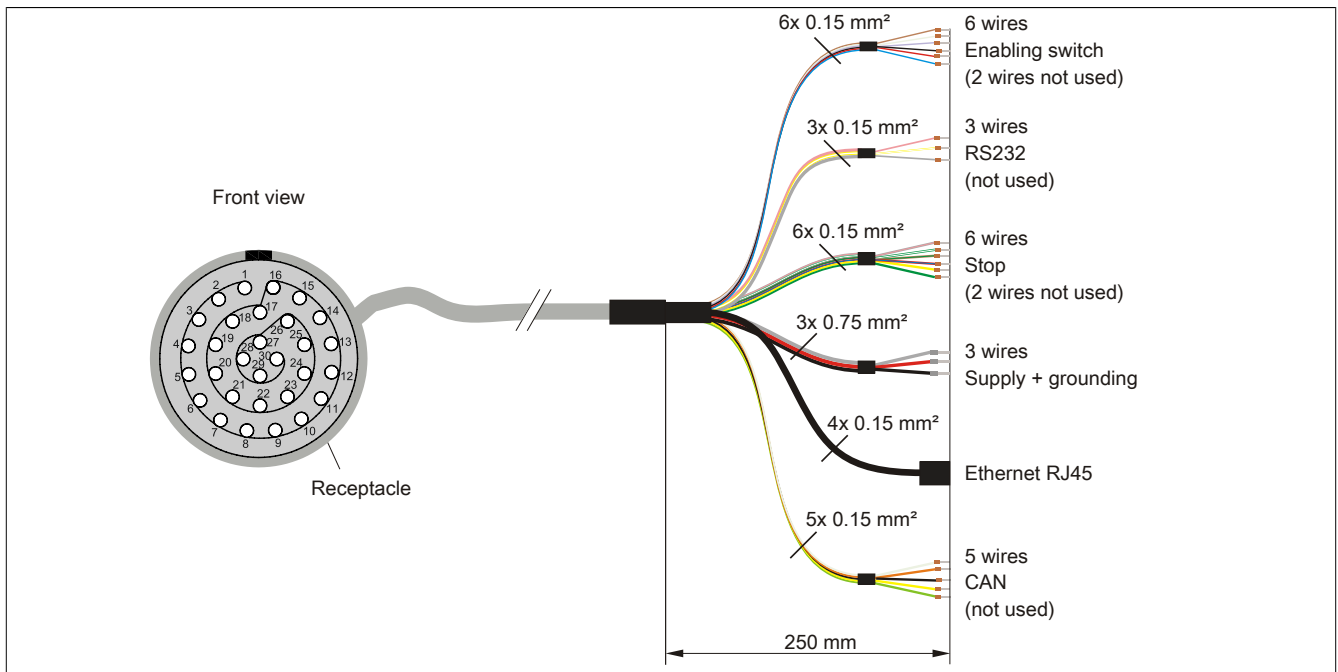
5CAMPC.0020-11 - Control cabinet cable layout
